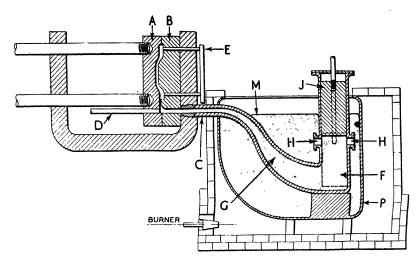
GOOSENECK DIE-CASTING MACHINE
